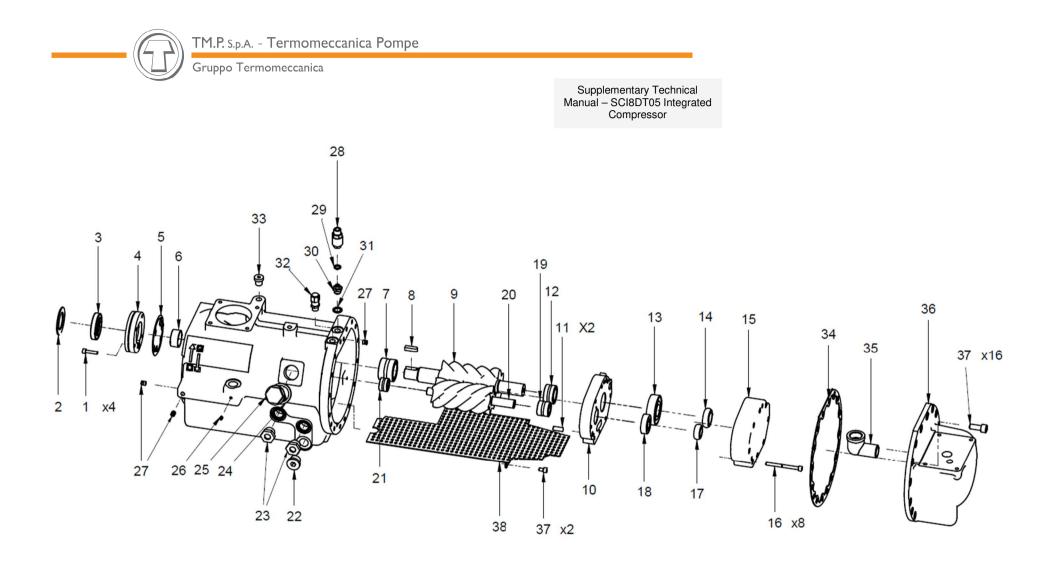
Assembly of discharge cover and discharge casing, of ring nuts and of rotor
